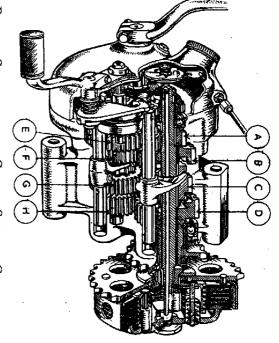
SECTION THROUGH GEARBOX SHOWING GEARS AND CLUTCH WITH ACTUATING MECHANISM.
